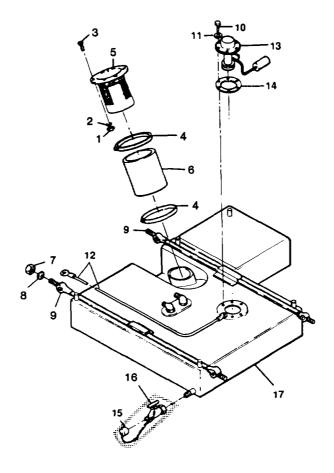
Main Fuel Tank (Plastic), Removal and Installation
